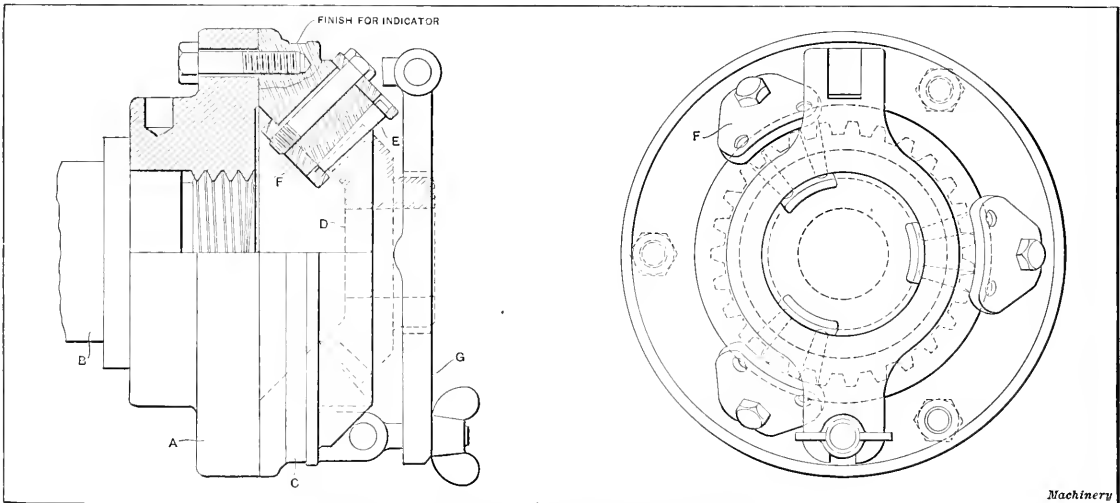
Bevel Gear Chuck with Tapering Rolls which bear against Sides of Teeth
